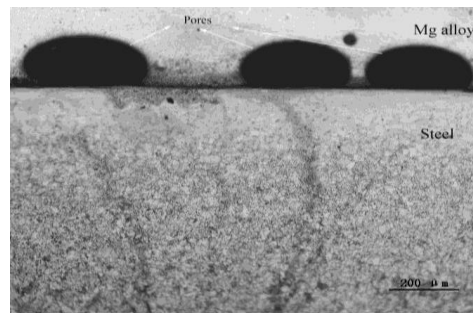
Cross-section morphology of Mg-steel joints with 0.5 s of welding time and 9 kA of welding current.
